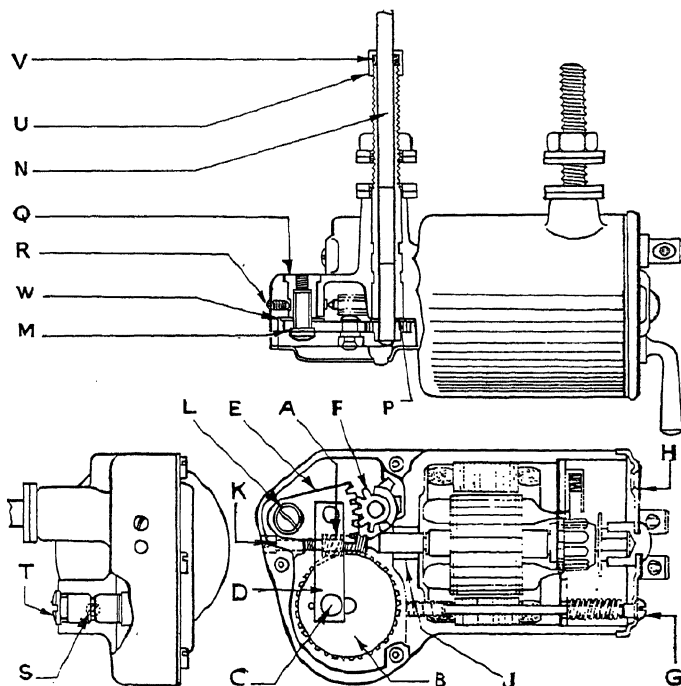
C.A.V. TYPE BWN WINDSCREEN WIPER PARTIALLY SECTIONED TO SHOW INTERIOR CONSTRUCTION
